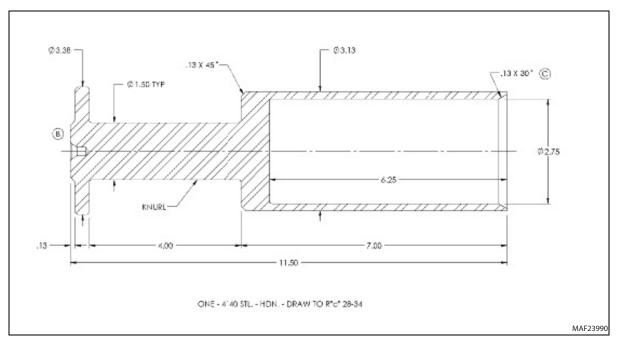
Bearing Cone Pressing Tool (T145741)
